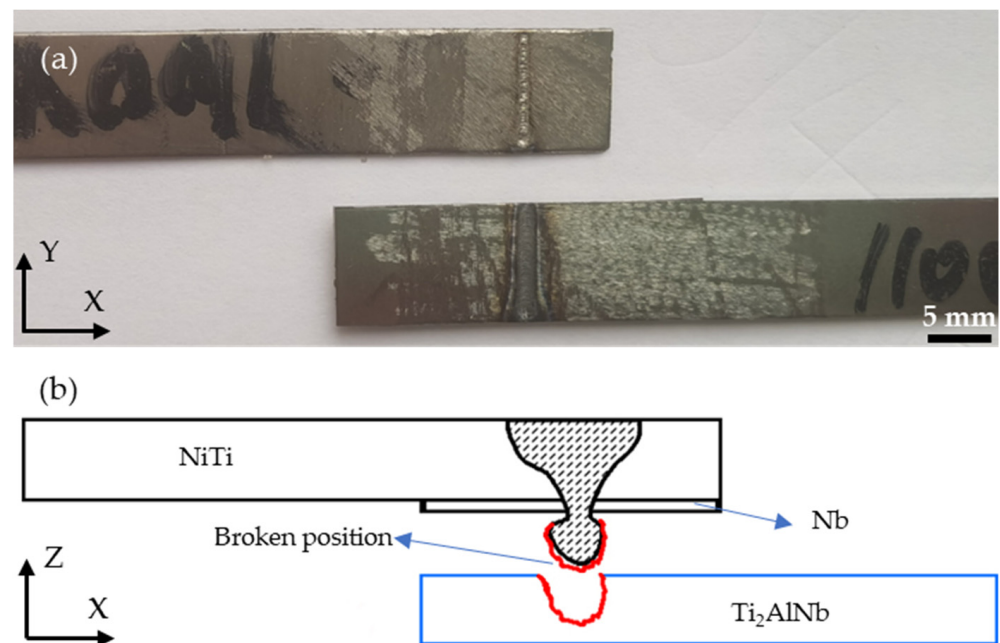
Fracture mode I: (a) Tensile fracture specimen; (b) Schematic diagram of fracture (The red line indicates the fracture surface).
